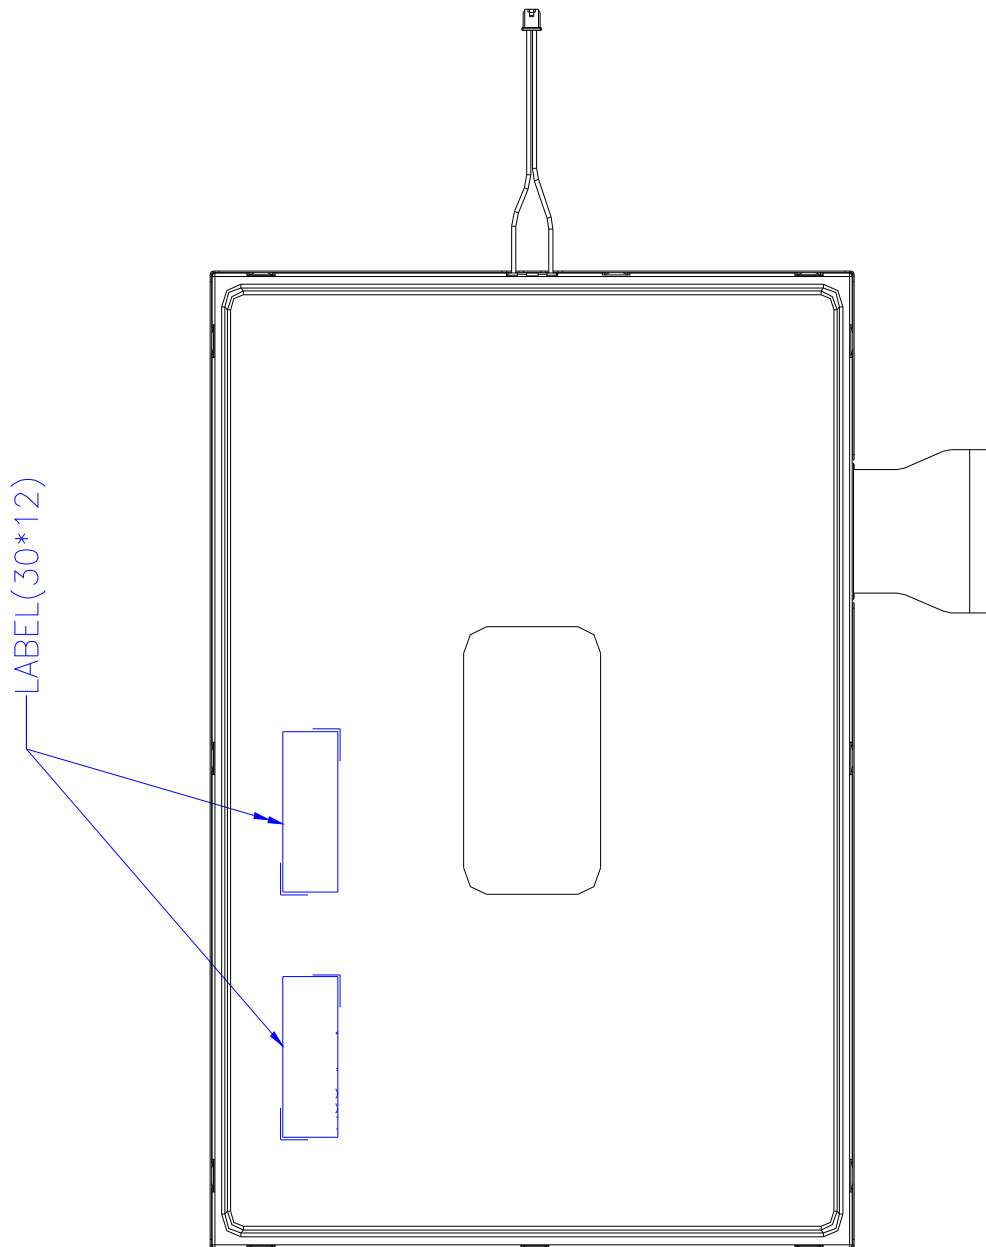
(b) Outline dimension of TFT-LCD module(Back side)
